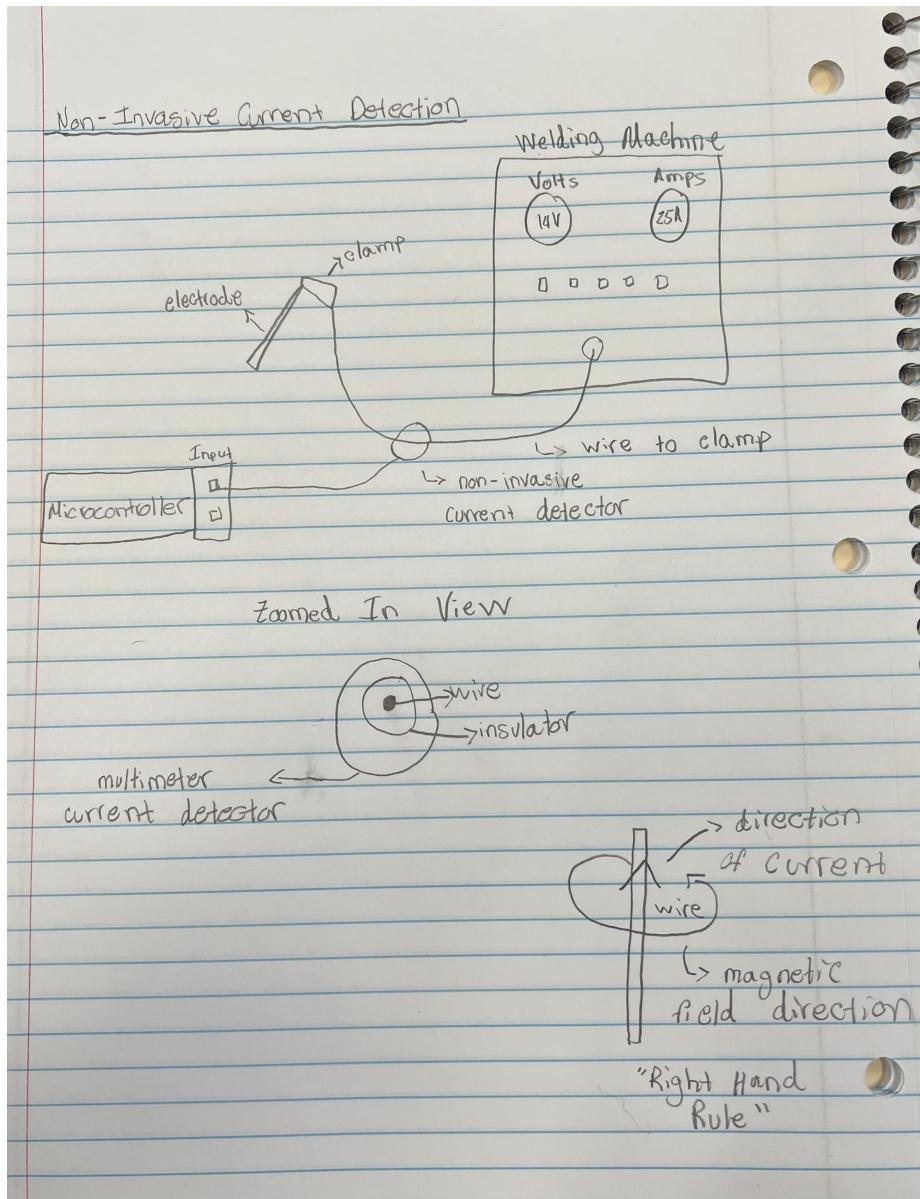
This photo shows how we will implement current detection on existing welding machines. Using the direction of the current, we can determine the direction of the magnetic field. Then we can place a multi-meter sensor over the wire to determine the current. This allows our design to be implemented on existing machines without alterations.
